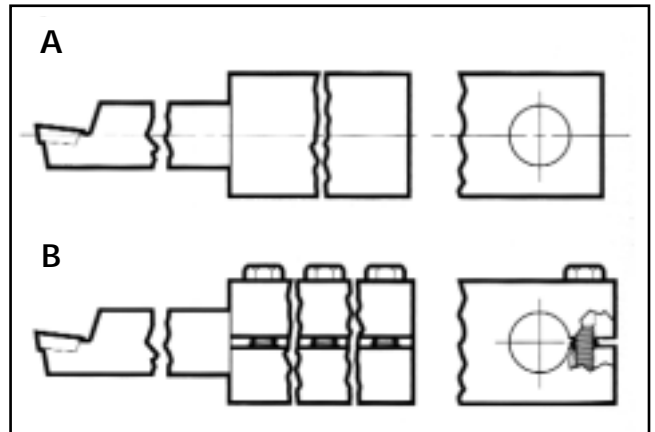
A) The boring bar and mounting block are one piece. B) A split block clamps around the circumference of the boring bar.
